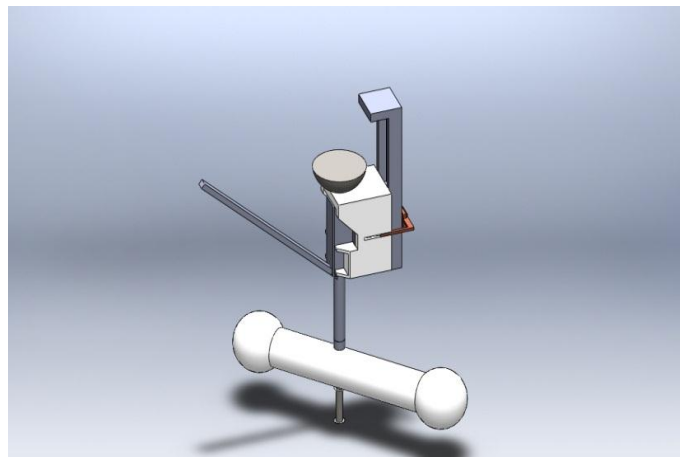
SolidWorks drawing of the hydraulic slider design. The slider is at its lowest point demonstrating when the surgeon has drilled through the bone.
